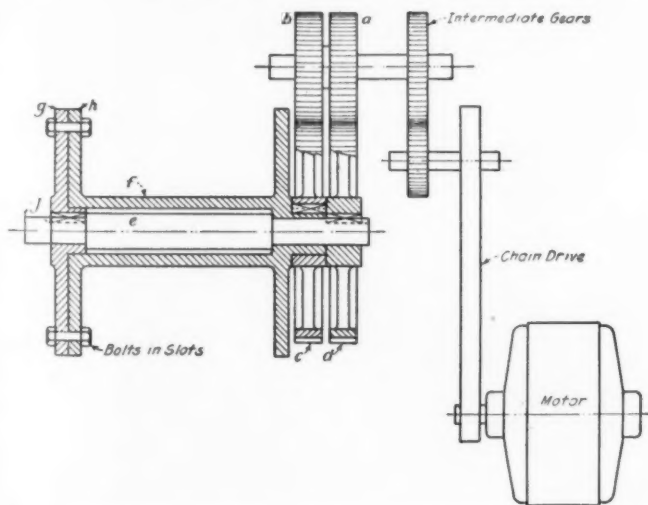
LAYOUT SHOWING PRINCIPLE OF OPERATION OF APPARATUS USED IN TESTS
